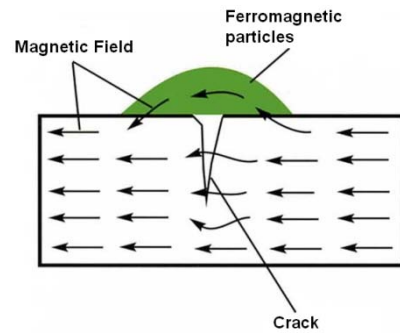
identification of cracks and craters in the weld [8]
